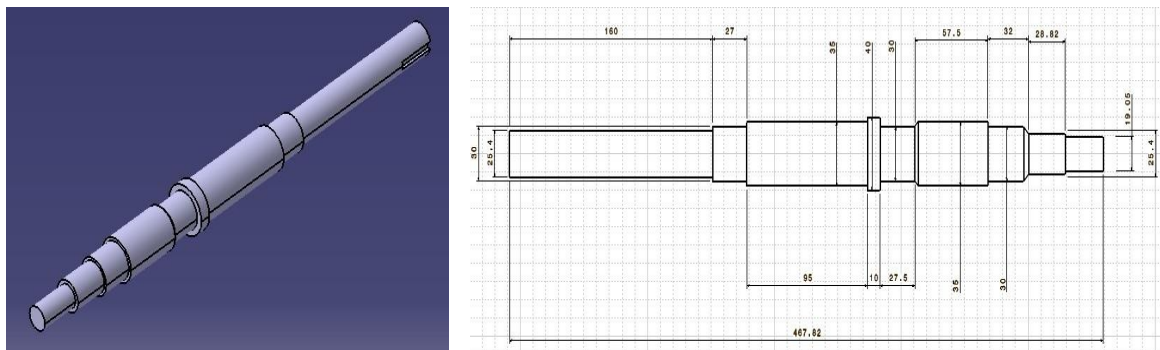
Shaft with Raised Pads (Left); Cross-section of the Shaft (in mm, Right)
